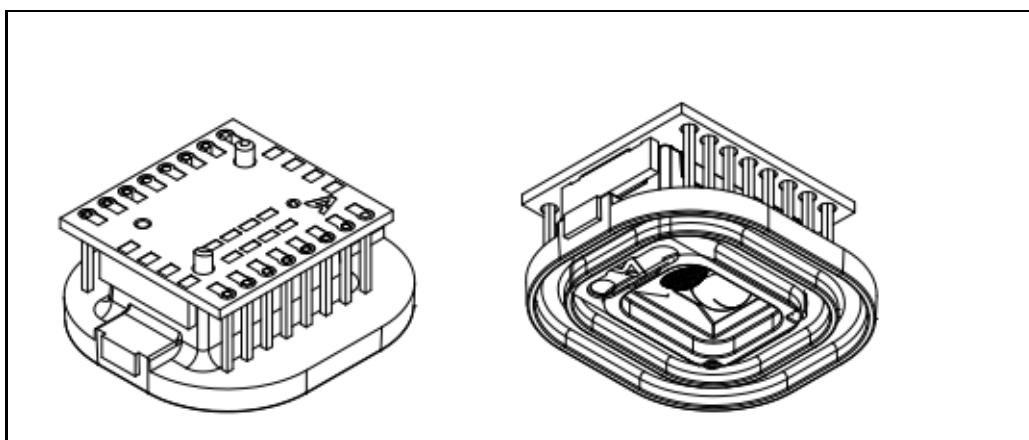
Isometric Drawing of ADNS-9800, PixArt Imaging Inc [36]
